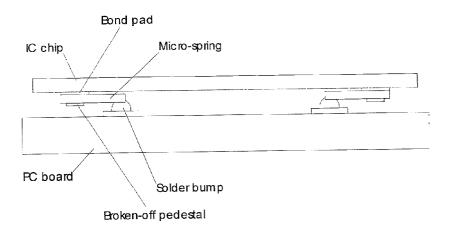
Cross-section view of IC or MEMS chip with micro-springs, bonded to PC board.
